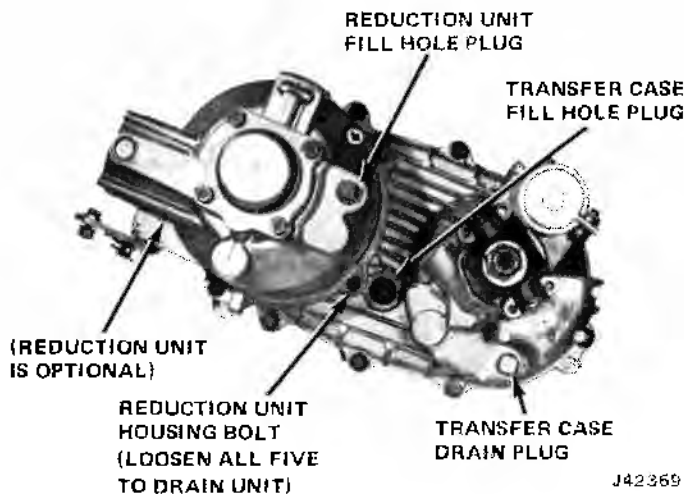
Quadra-Trac Drain and Fill Plug Locations
